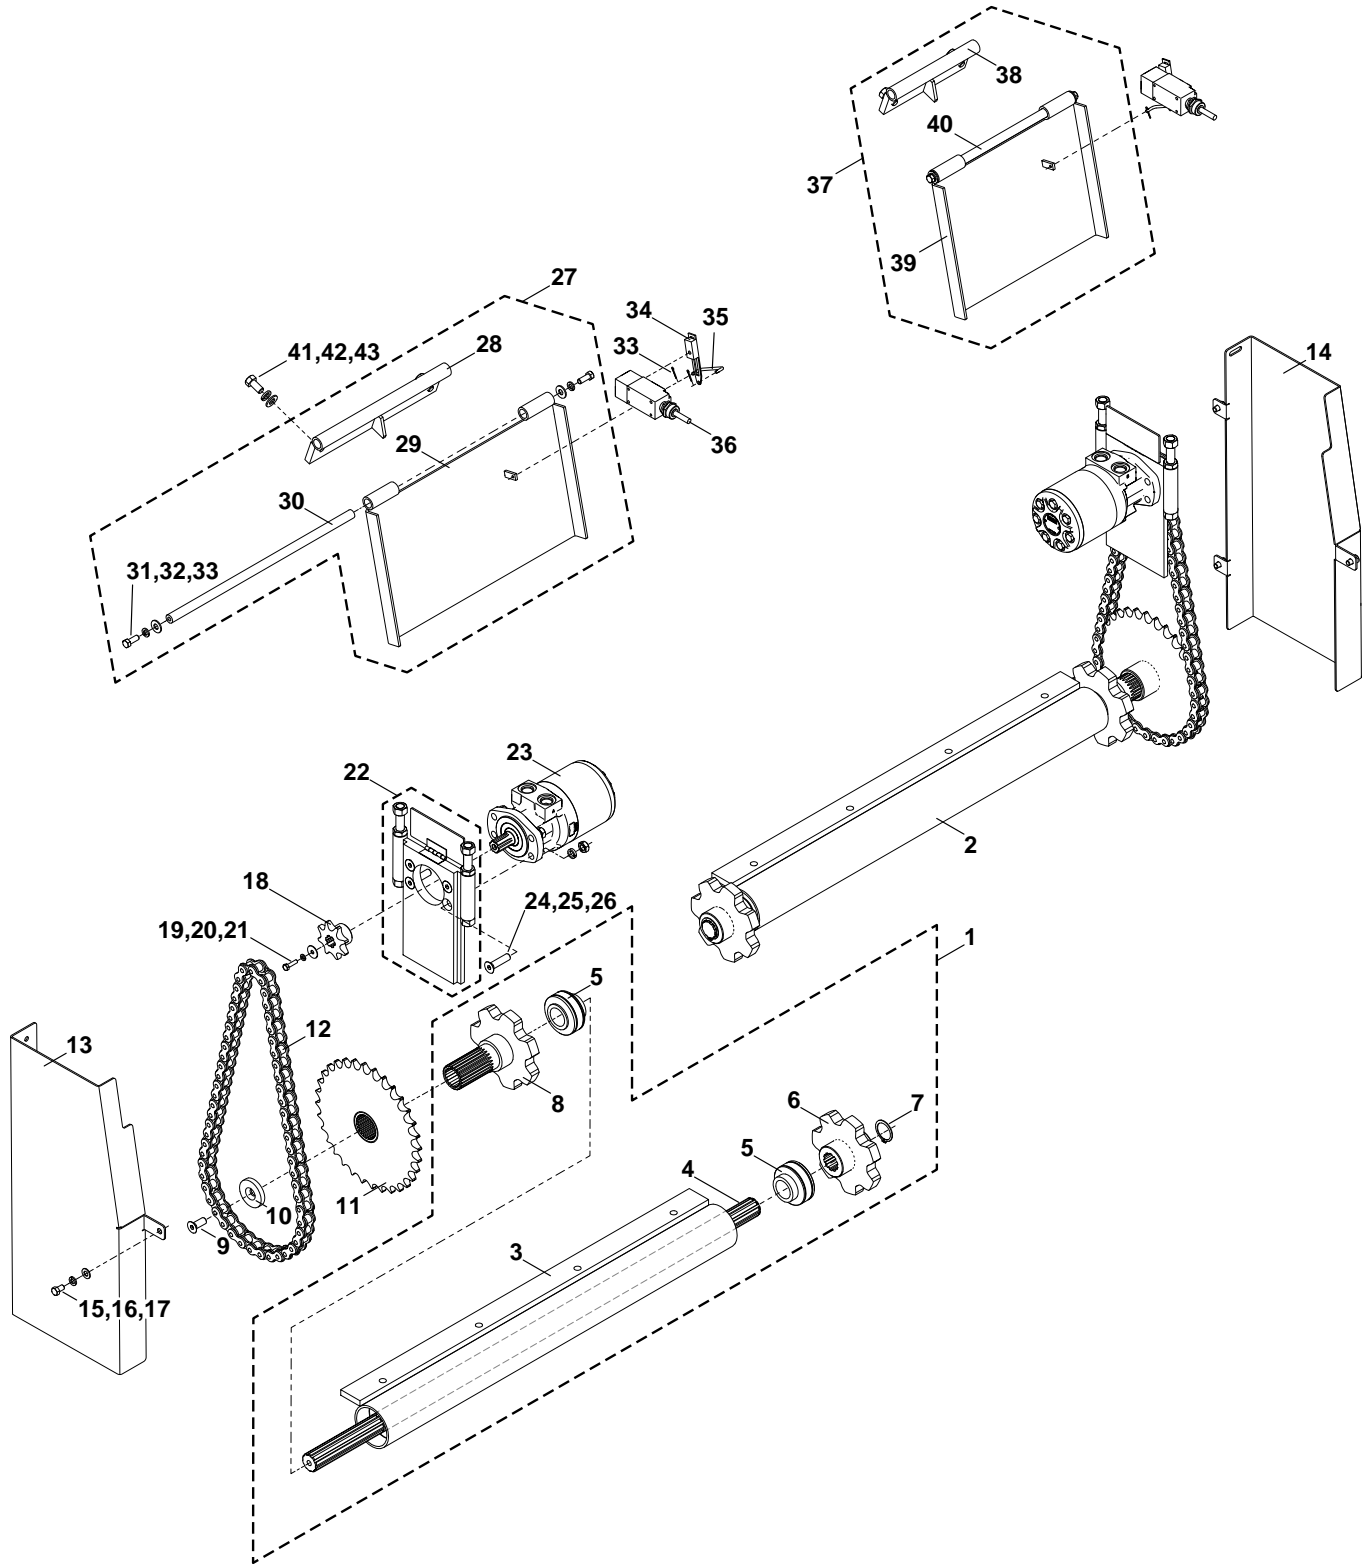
Conveyor Drive & Paddle Assembly (1 of 2)
